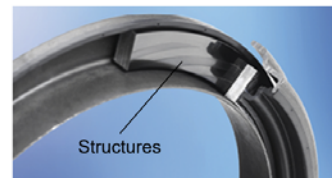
Gas-lubricated mechanical seal Levitex® in a sectional view
